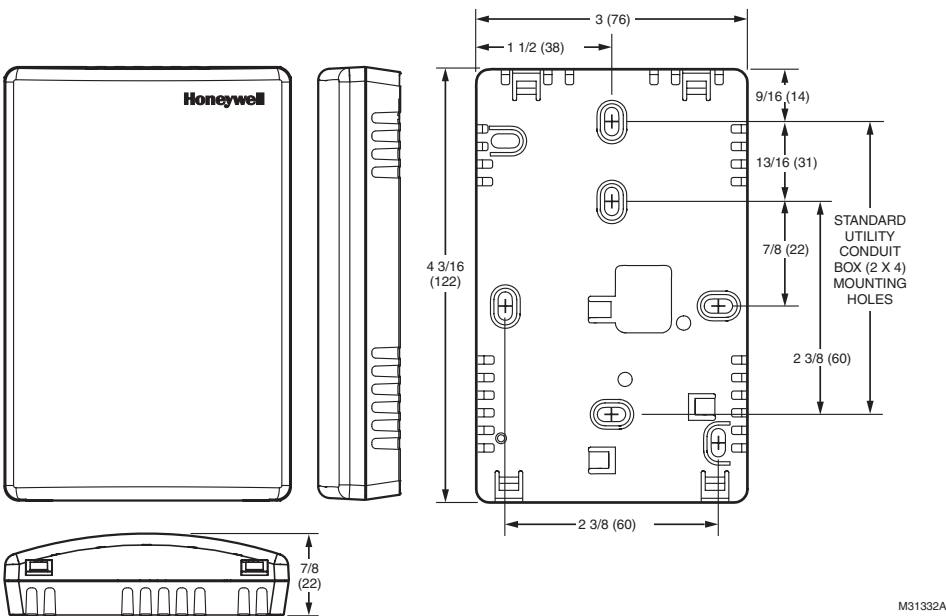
Wall-mount Sensor Dimensions in In (mm).
